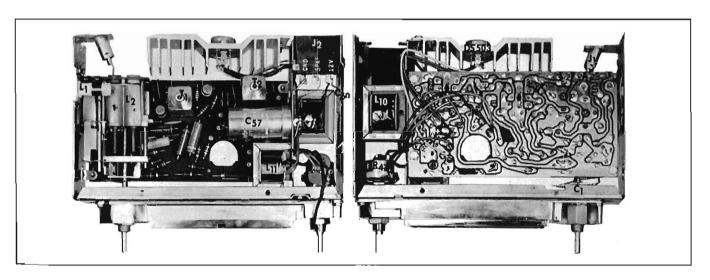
CORVAIR 95 PARTS LAYOUT - CIRCUIT BOARD VIEW - 986330 - RADIO
